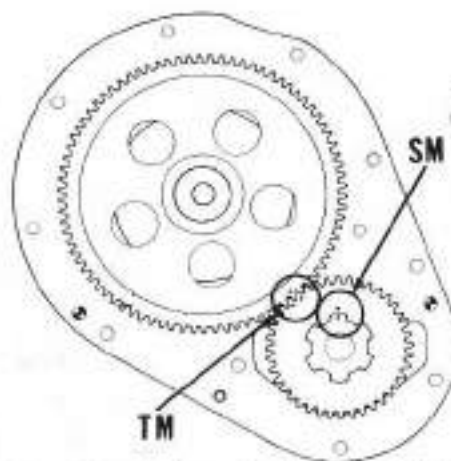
Drawing showing timing marks (TM) on crankshaft gear and camshaft gear of 3-cylinder engines. Late production camshaft gear has a tooth marked "D" for diesel engines and another tooth marked "G" for gasoline engines; use appropriately marked tooth meshed between the two punch marked teeth of crankshaft gear. When installing crankshaft gear, be sure spline marks (SM) are aligned as shown.
